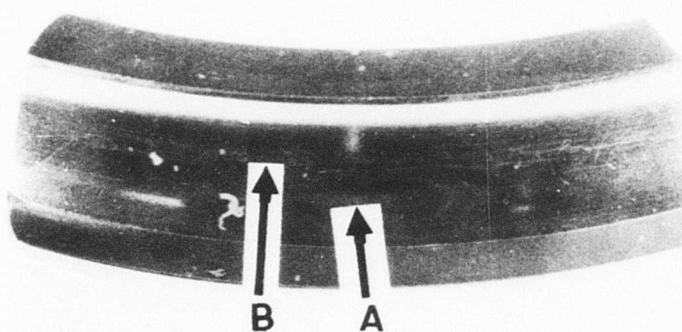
Macro Photograph of Surface Distress in Bearing Ring. (2X)
